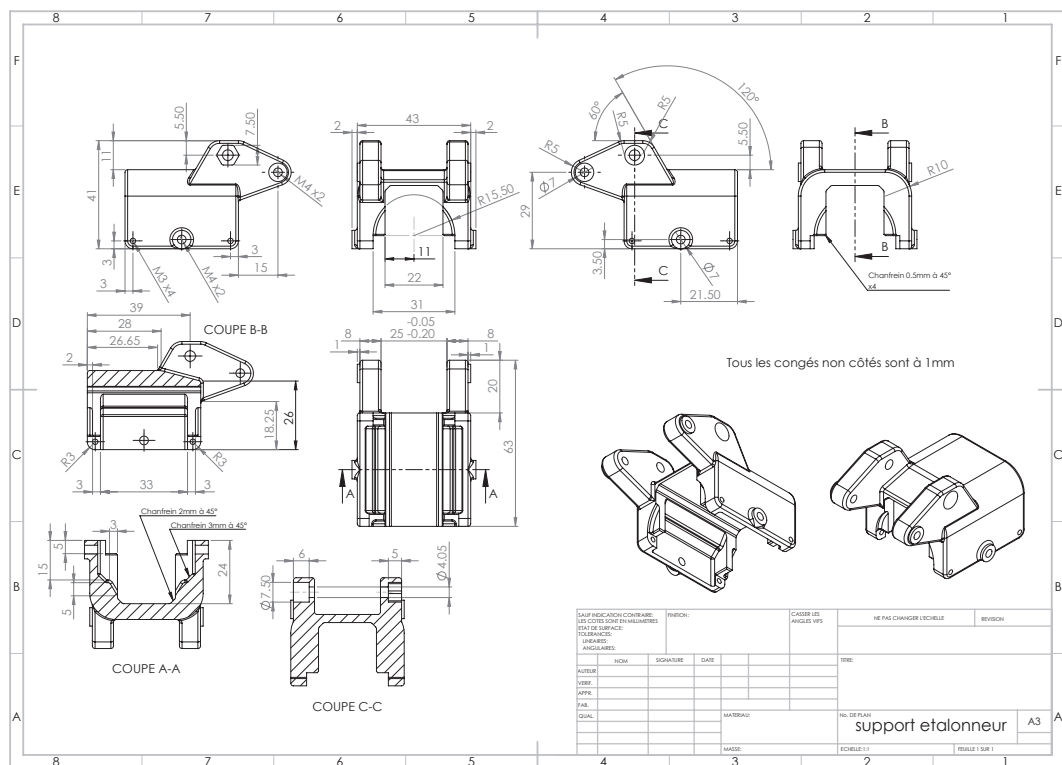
Dimensioned drawing of the support of the calibrator. Provided by CTTM.
